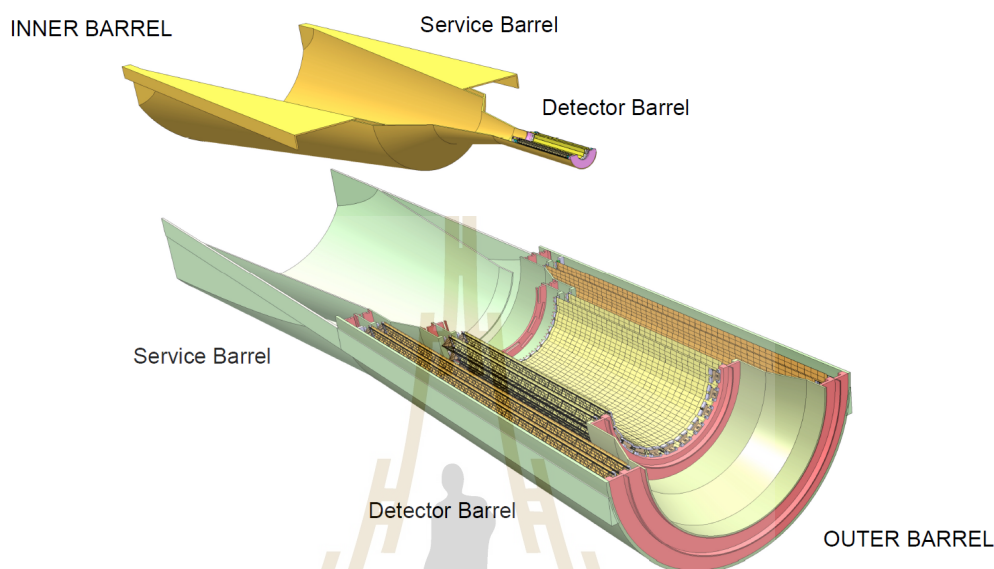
The layout of the new ITS barrels. Both Inner Barrel (IB) and Outer Barrel (OB). The visualization shown the half barrel for each types. (Aamodt et al., 2008)
